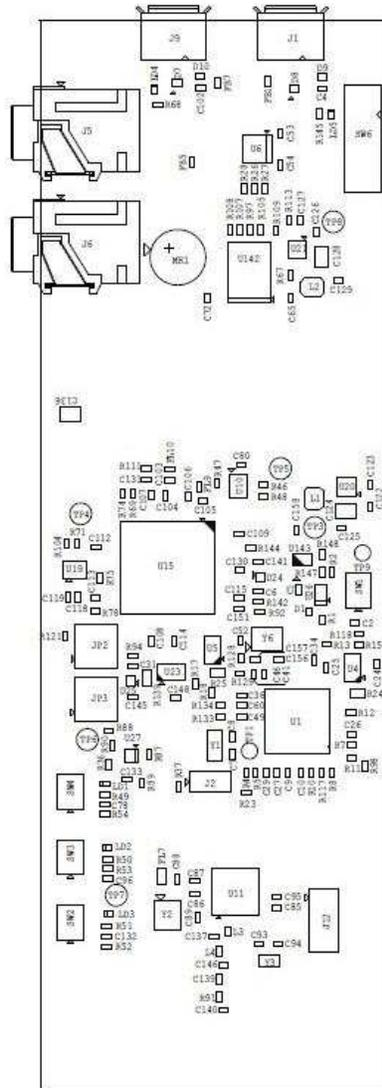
C5545 BoosterPack Board Assembly Layout - Top View
